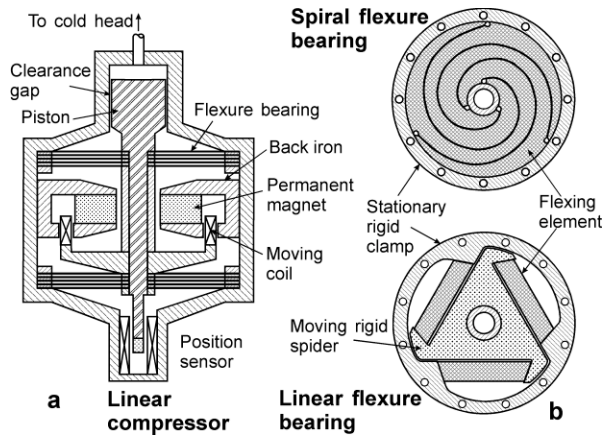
(a) Cross-section of the Oxford-style linear compressor. (b) Two types of flexure bearings.
